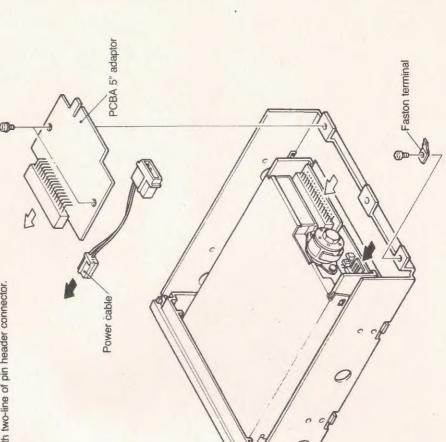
Assembling of PCBA 5" adaptor and Faston terminal
